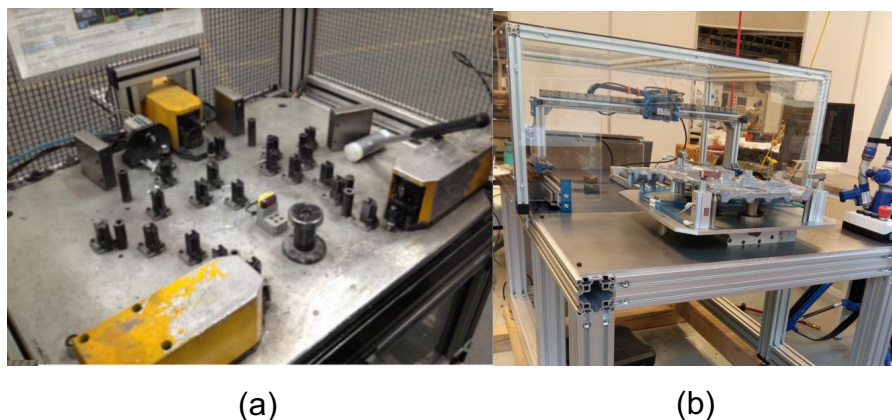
a) Machine with LDVT b) Machine with a laser sensor.
